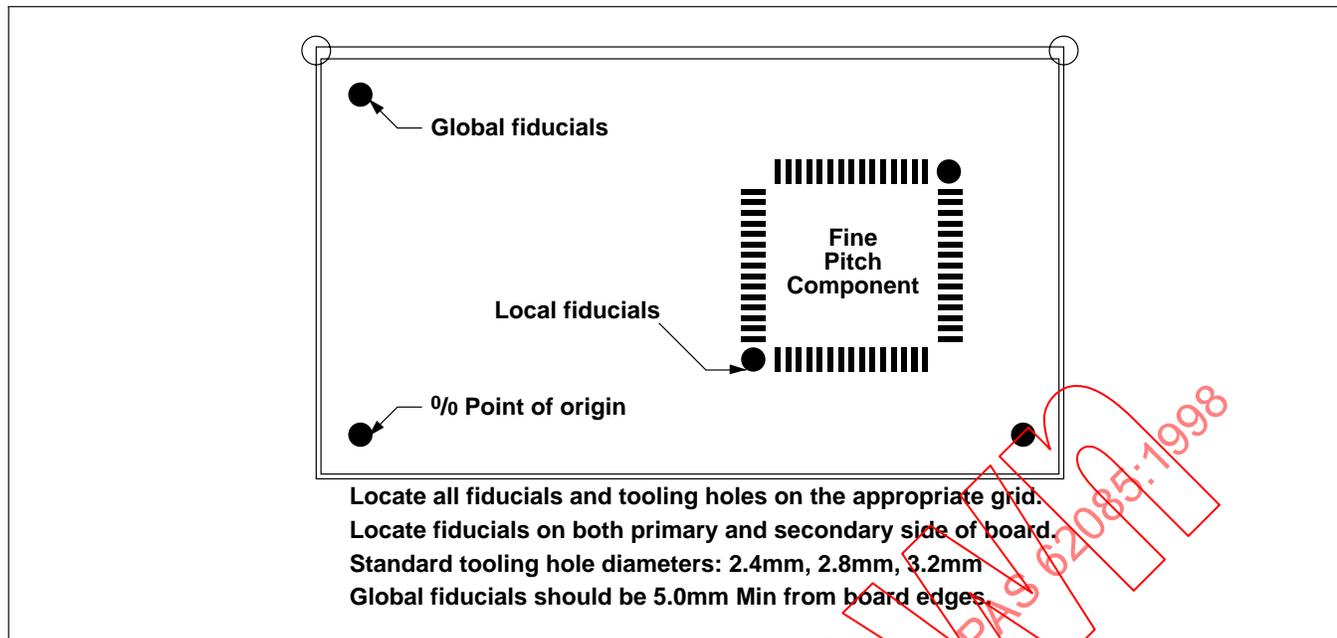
Fiducial Locations on a Printed Circuit Board
